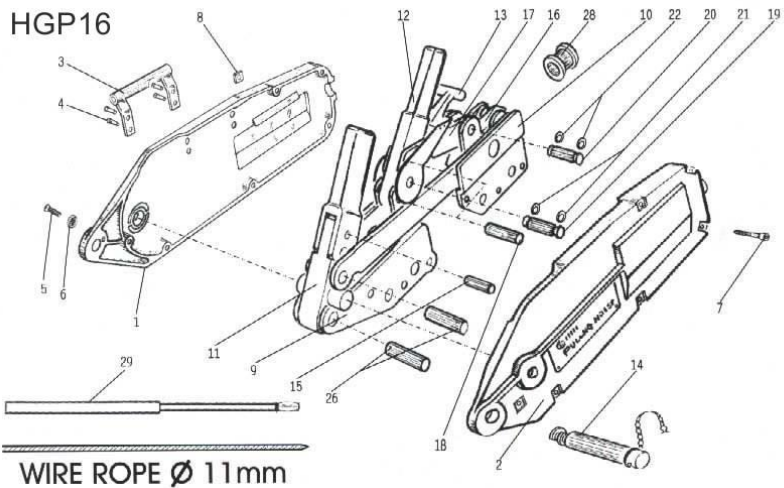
Exploded Fig. of HGP Series Grip Puller
